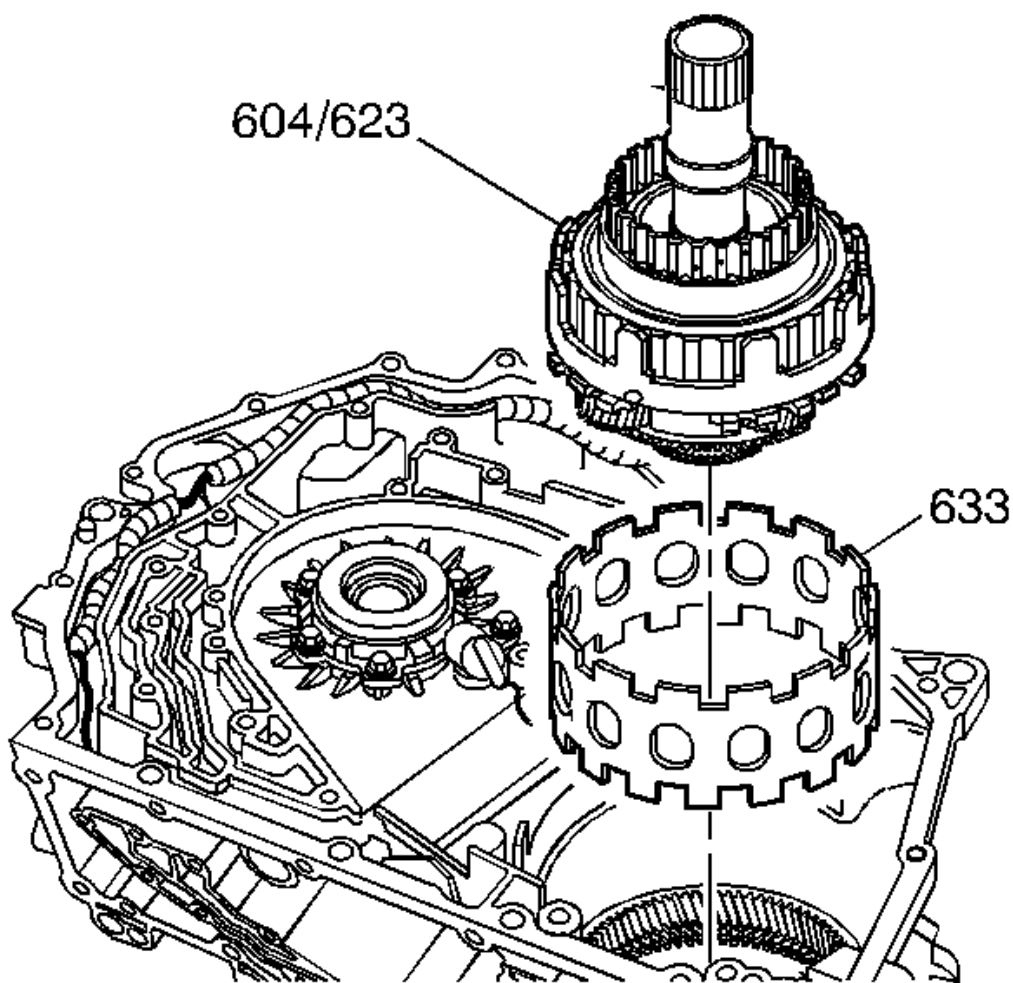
View Of Reaction Carrier/Shell And Third Clutch
